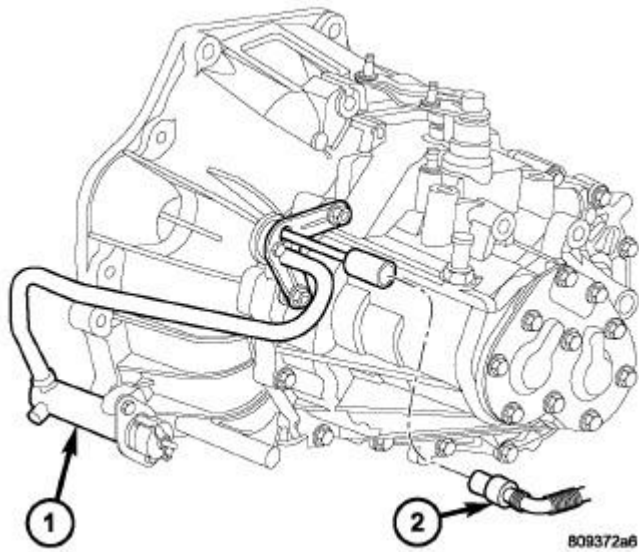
Clutch Hydraulic Line to Slave Cylinder
